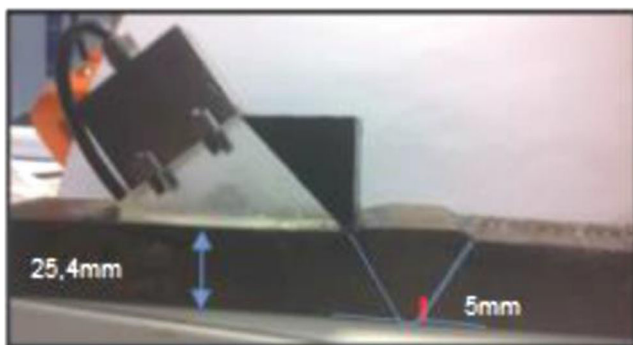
Root defect on a carbon steel welded plate [22]
